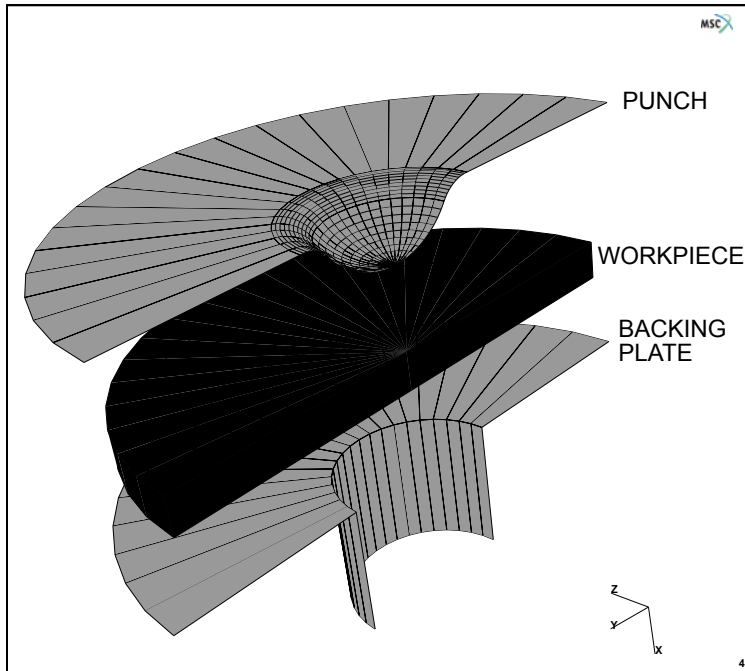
Punch, Workpiece, and Backing Plate
